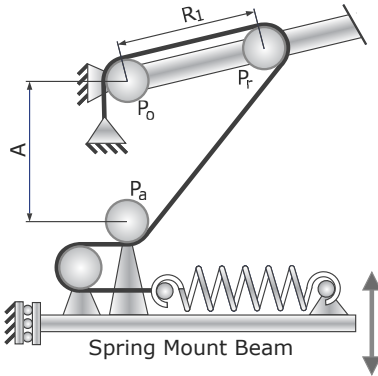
A possibly better spring cable guiding mechanism. By using three pulleys (P_o , P_r and P_a) of equal diameter, though larger (40 mm) as compared to the original P_a pulley (10 mm), the friction is removed. Lowering the spring cable tension by using a slacker spring and increasing the A and/or R_1 distances further reduces the friction, although this needs more space for spring deflection and longer springs. The amount of support cannot be adjusted by changing R_1 anymore, as the change in cable length between P_o and P_a negates the ideal spring mechanism. Instead, A now needs to be lowered or heightened, together with the spring and spring tube.
